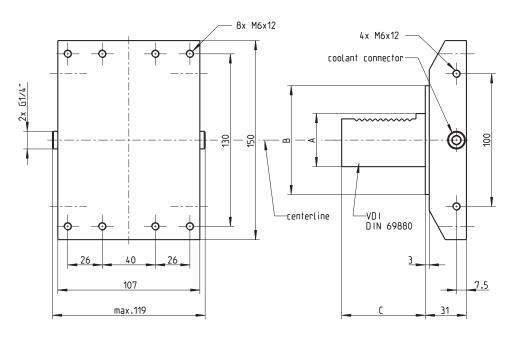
Machine adapter with straight shank for disk-type turret with VDI tool holding fixture Type 9129AB...
